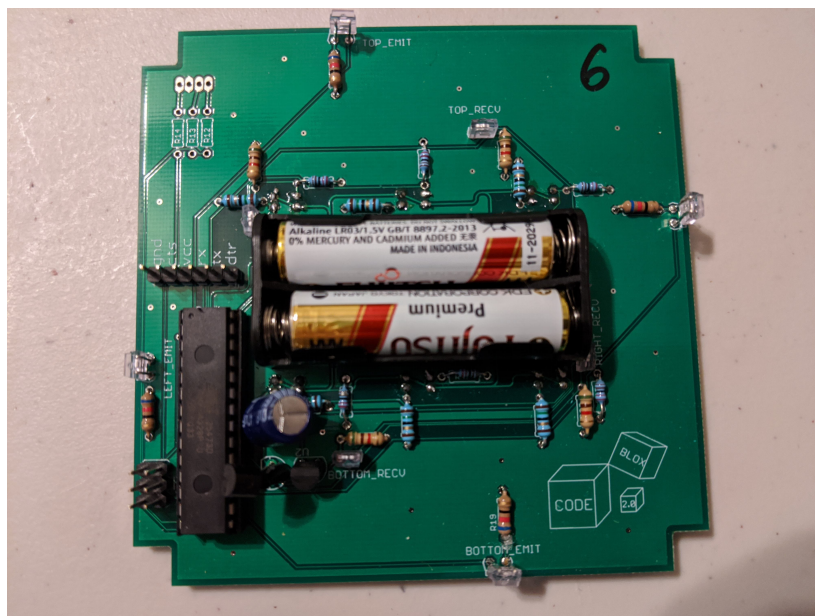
Bottom side of soldered PCB. You can see the IR circuits at the edges of the tile for communication and the battery and micro-controller towards the center.
